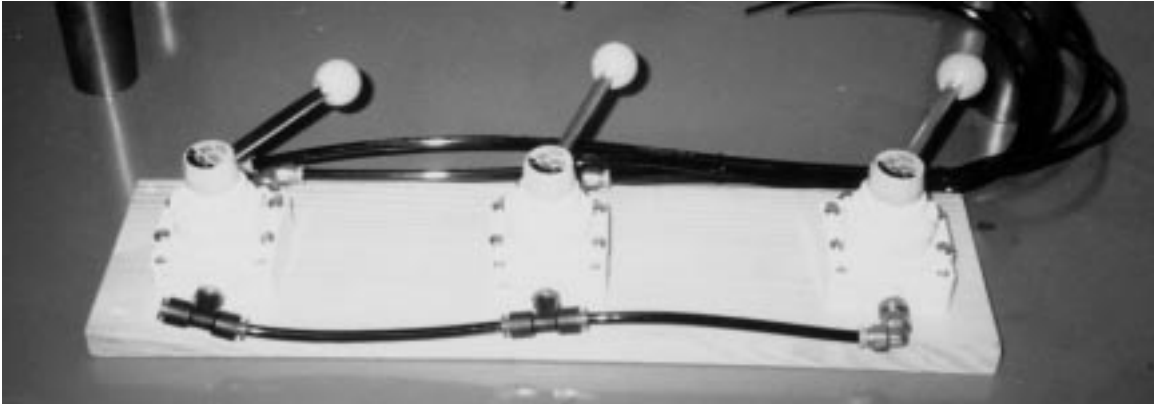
Valve system for controlling the pneumatic devices on the test assembly station. Left valve for large cylinder used for outer ring distortion, middle valve for medium cylinder (unused) underneath station and right valve for small cylinder (also unused).
